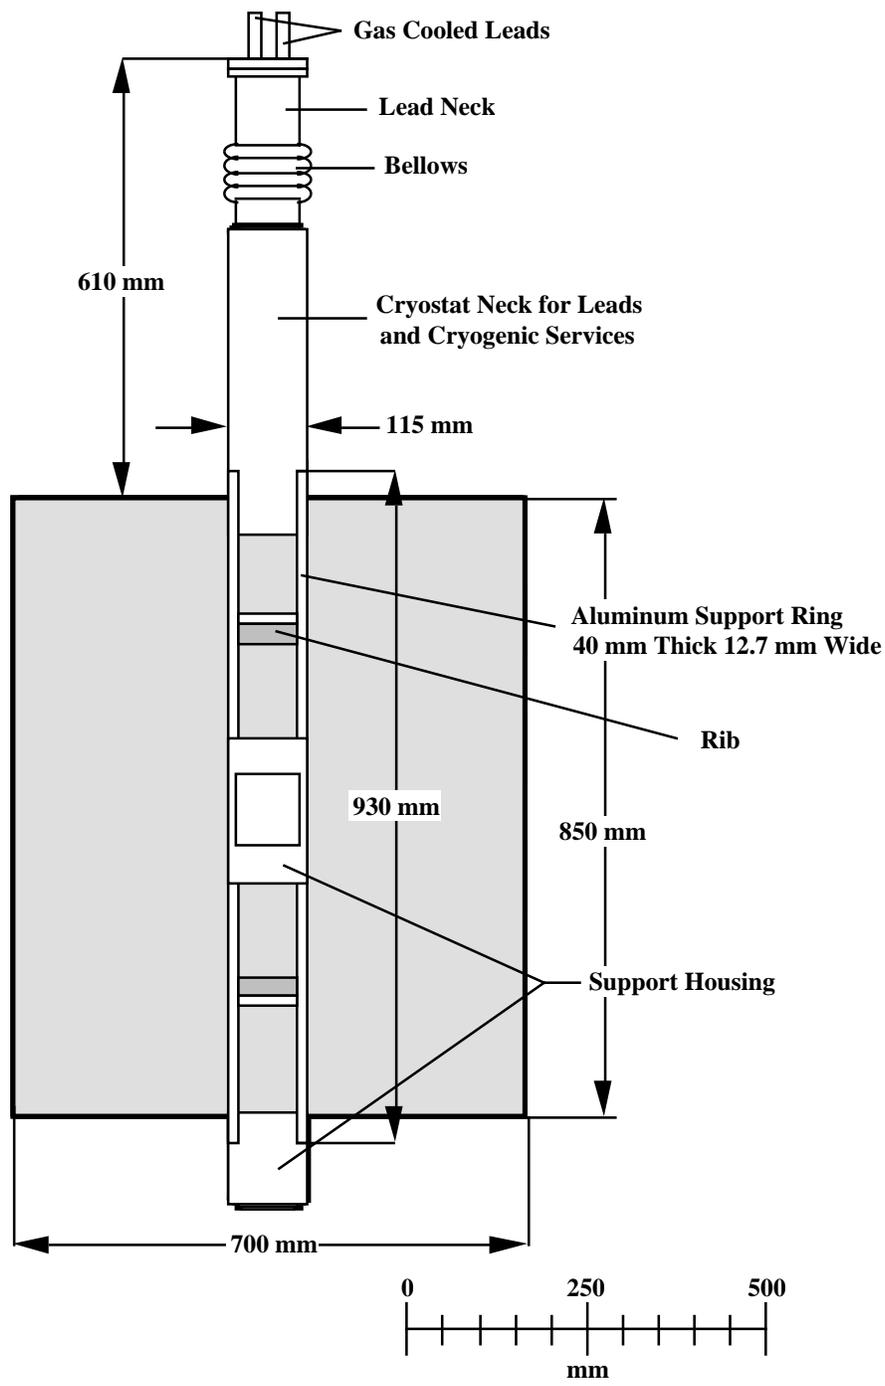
A side View of the Assembled Sixteen Quadrupole Array Cryostat
